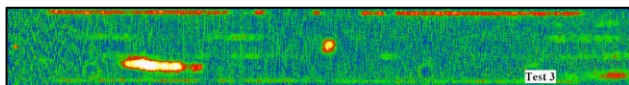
Ultrasonic inspection of 500 x 50 mm test piece brazed with zero gap. The four brazing grooves are visible in addition to an unbrazed region. The central hole is for US calibration.
